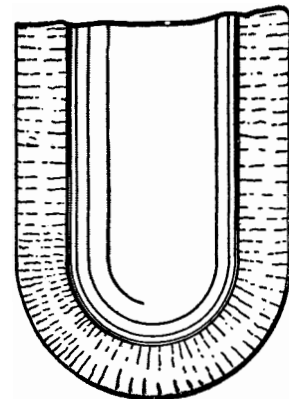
A CASTING OF THE STRONGEST FORM.
